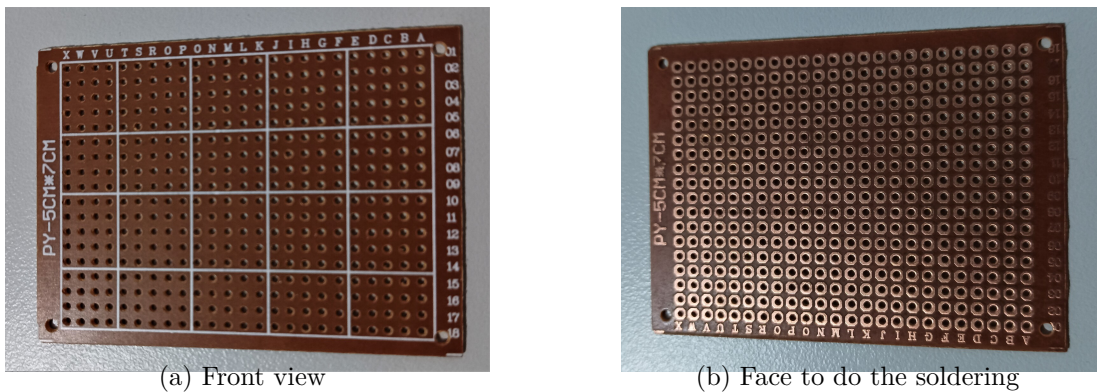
Universal Printed Circuit Board to fix the plug components
